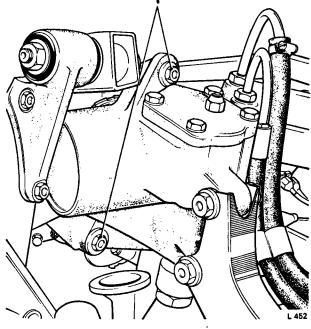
STEERING BOX MOUNTING/ ADJUSTING POINTS
